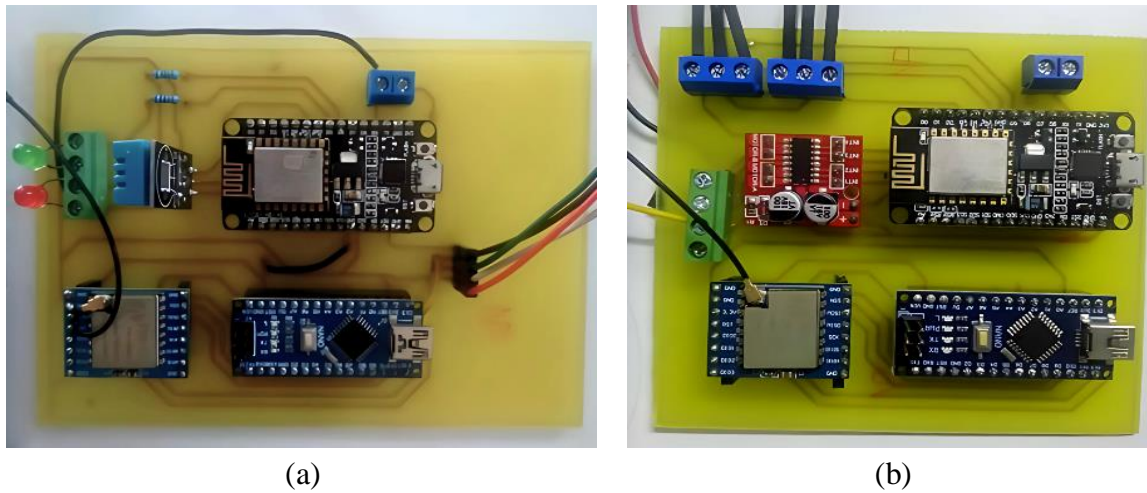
PCB Fabrication for (a) outdoor and (b) indoor devices
